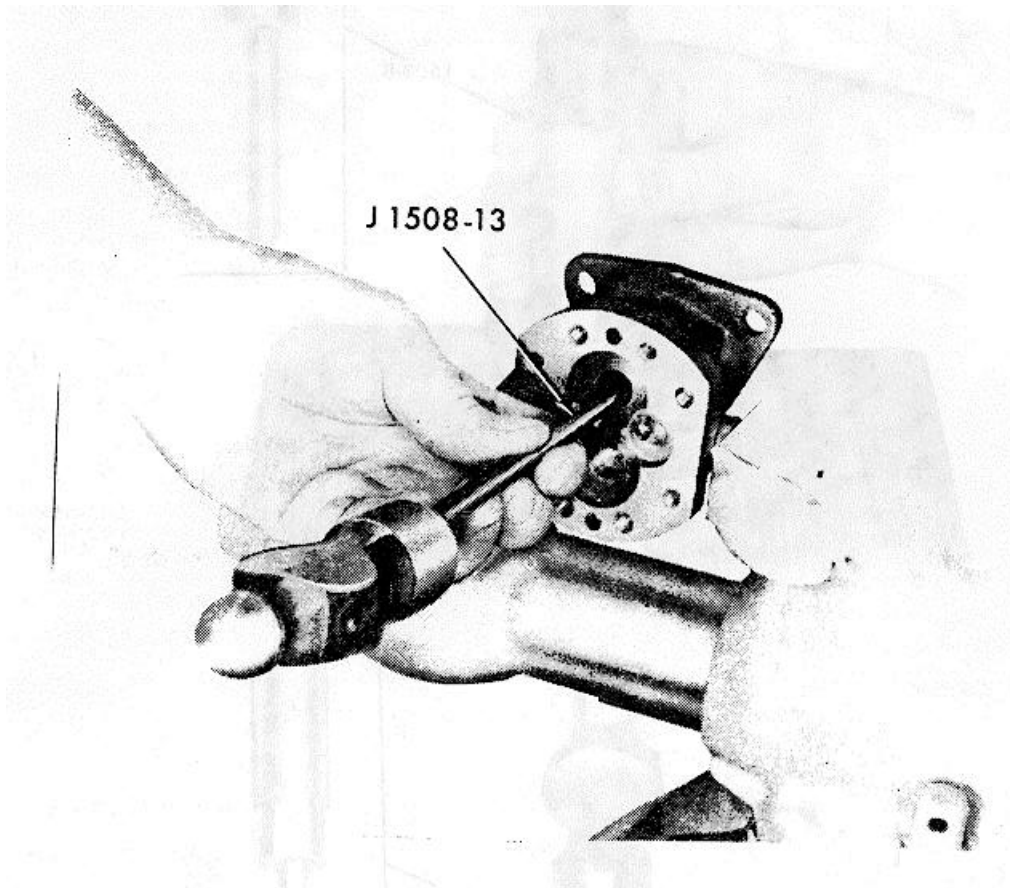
Fuel Pump Seal Removal (Sheet 1 of 2).
